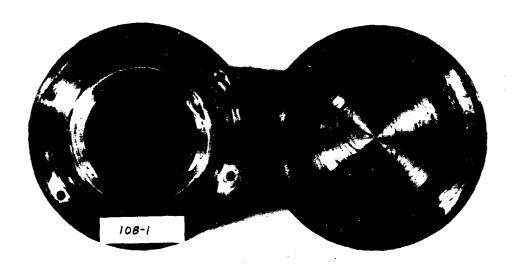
Carbon steel-flat flange test jig without anode after exposure showing corrosion of flange to seal.
